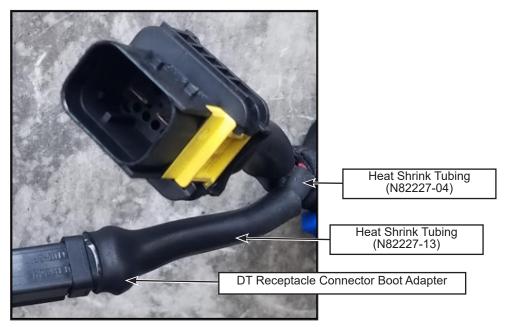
Heat Shrink Tubing Installation on DT Receptacle Connector
